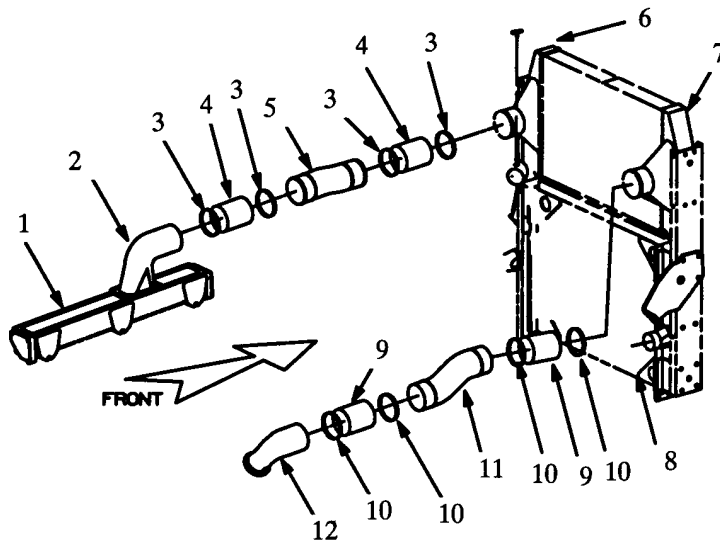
Charge Air Cooling System Mounted Stacked With Radiator, 9600/9700
